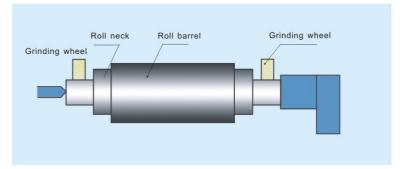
Fig. A: Grind the step of the roll neck as a reference surface, make sure that the roughness, radial run-out and concentricity are in compliance with the tolerance requirement after grinding.
